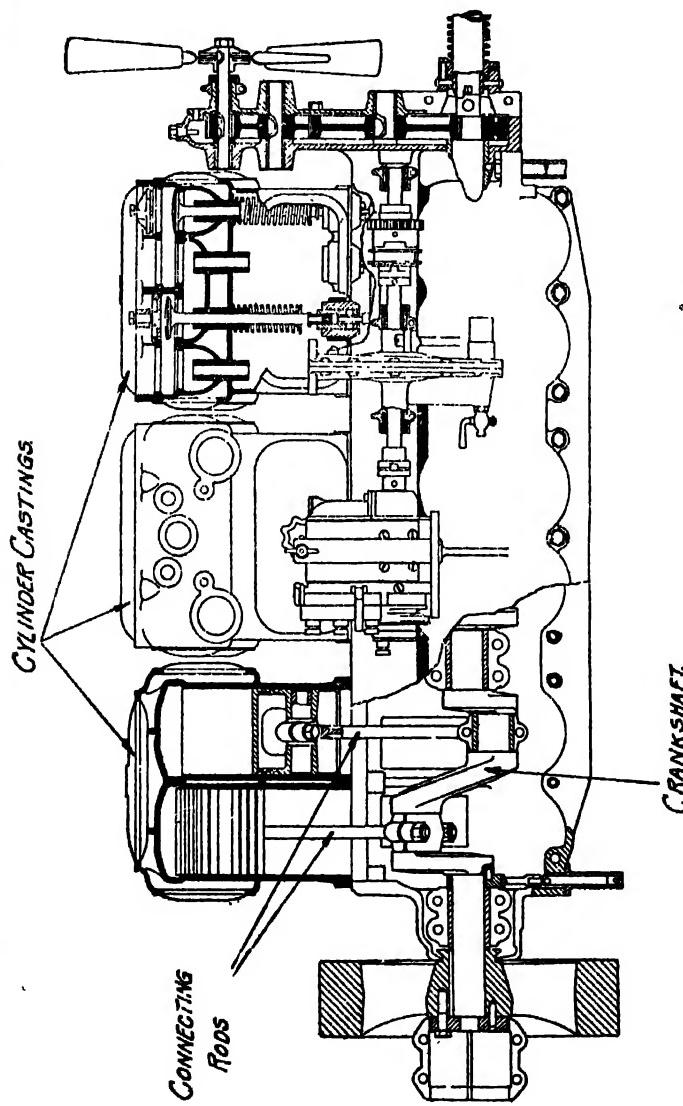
Part Sectional View of the Winton Six Cylinder Engine, an Unconventional Design, Having the Crank Case Divided on Vertical Instead of Horizontal Center Lines.
